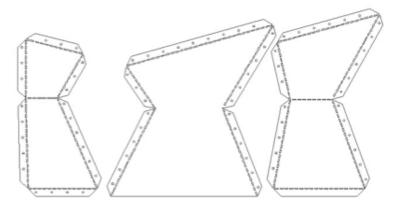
The laser cut frame could be cut out of flat sheet metal
